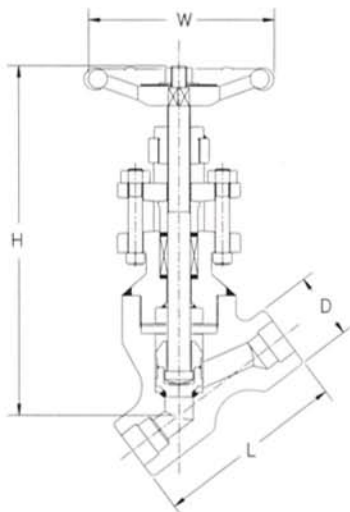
S-FS3 - WB - Y Class 800 (Socket Weld)
